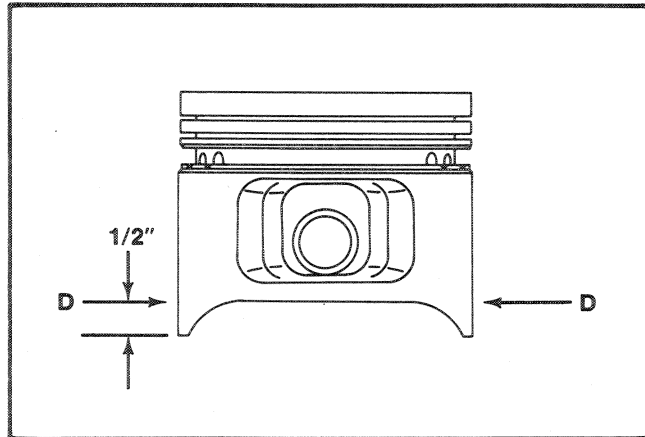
Measuring Piston Diameter (Style "D" Piston)
